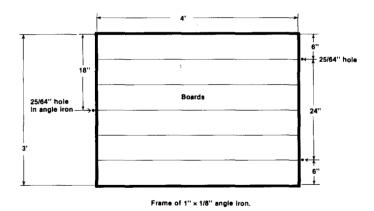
Top view of frame with boards in place showing locations of holes in angle iron for bolting to support pipes.
